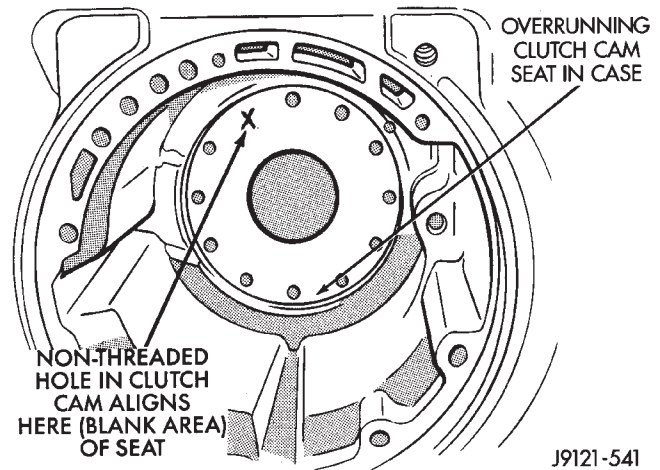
Location Of Blank Area In Clutch Cam Bolt Circle
